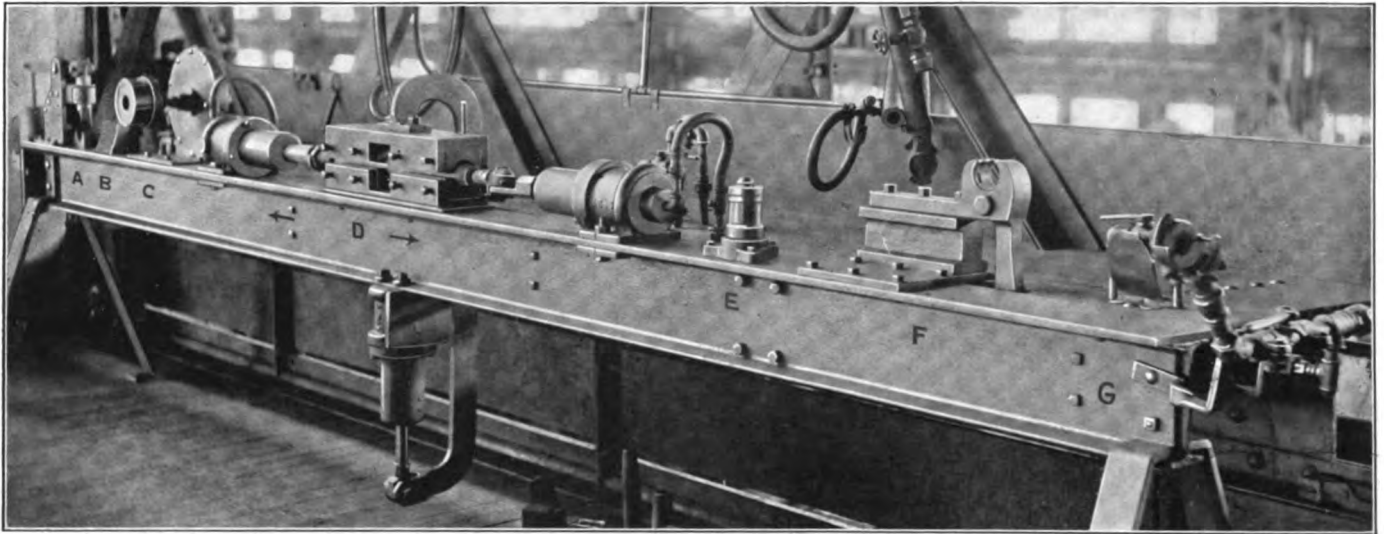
Apparatus for Mounting Air and Steam Hose.
